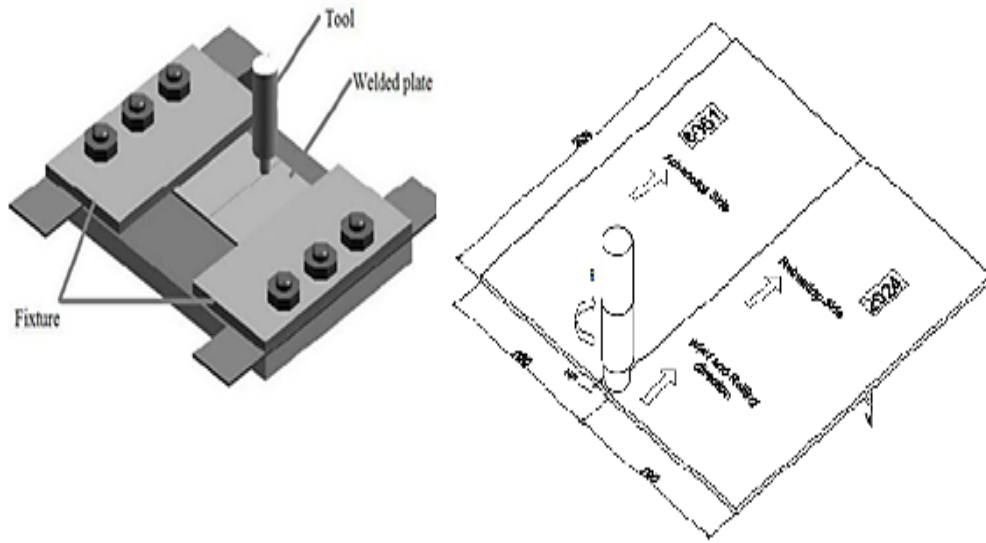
Schematic drawing for friction stir welding clamping
